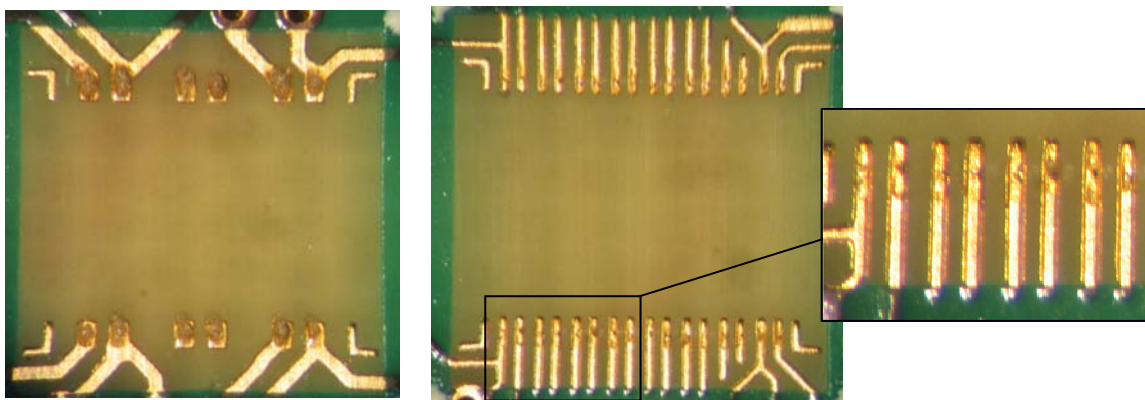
Printing ICA-30S on large pads (left) and small pads (right).
